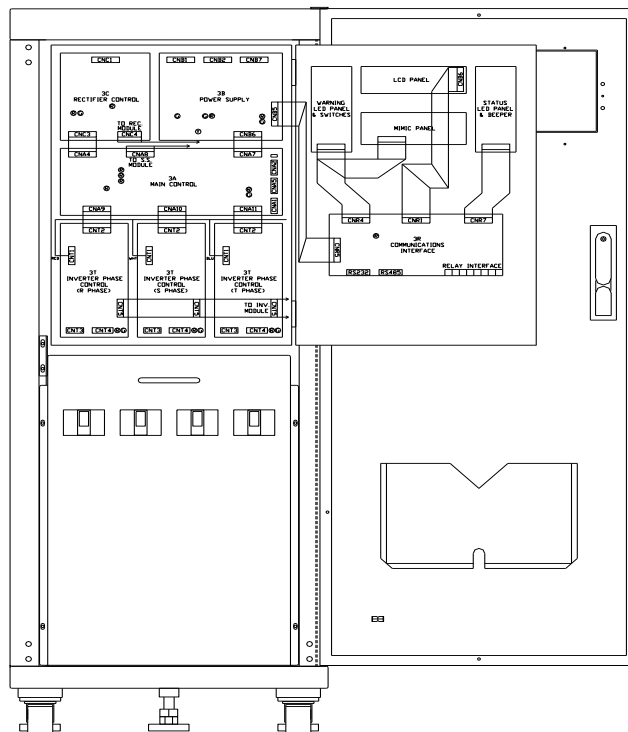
Front view of System with Door Open and PCB Module Door open
